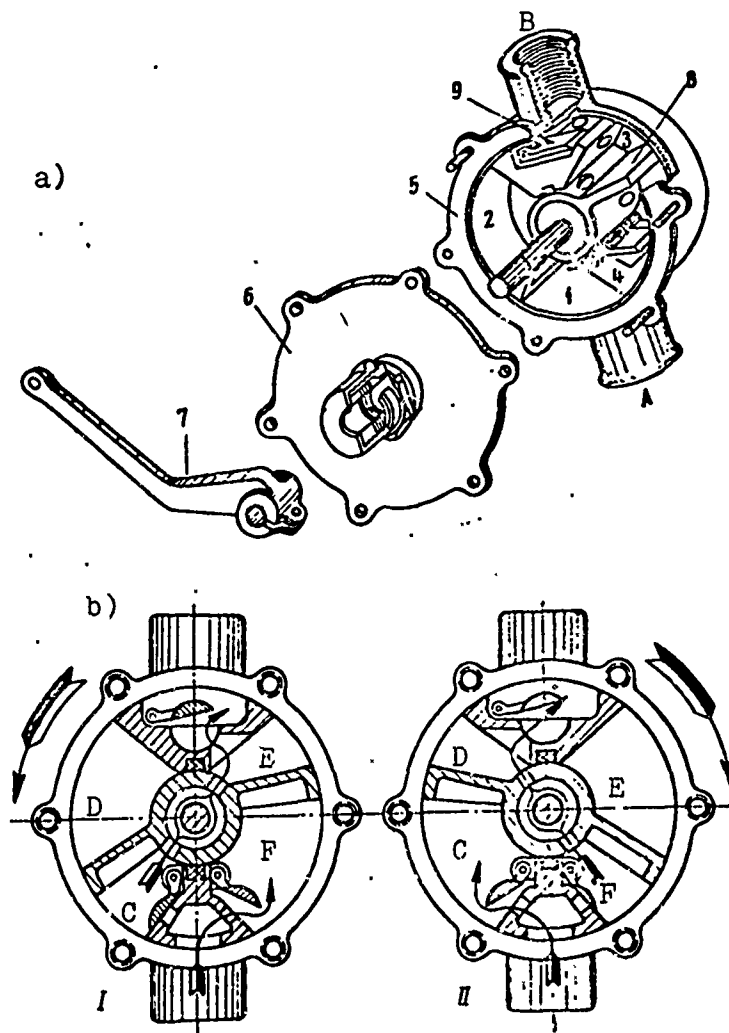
Hand fuel pump: a) pump device: 1, 2, 3, 4, - pump cavities; 5 - pump housing; 6 - cover; 7 - drive; 8 - impeller; 9 - delivery valve; A - entry of fuel; B - exit of fuel; b) diagram of operation of hand pump.
